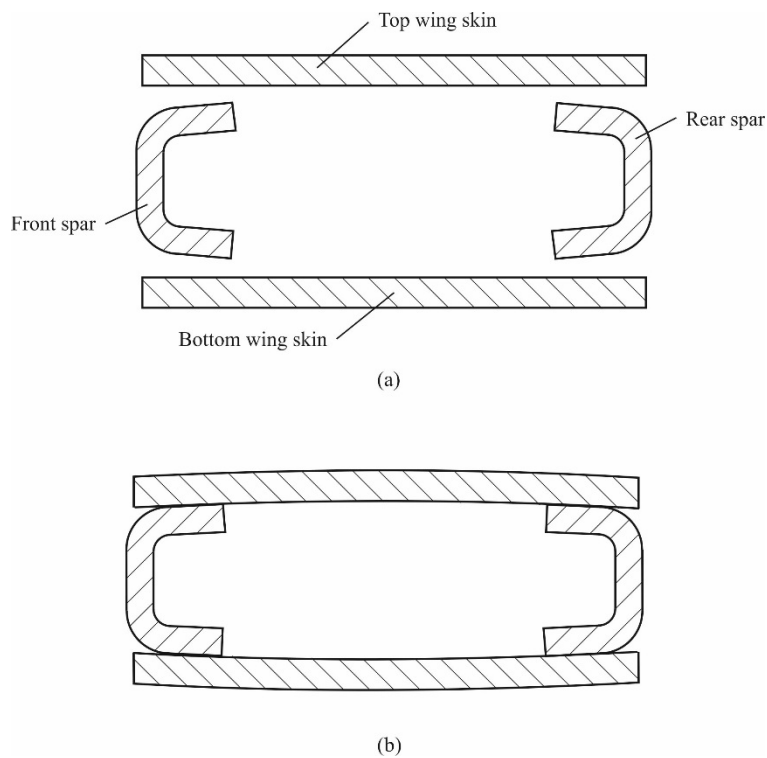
Diagram showing an example of the generation of assembly stress: (a) wing box components before assembly, (b) wing box structure after assembly.
